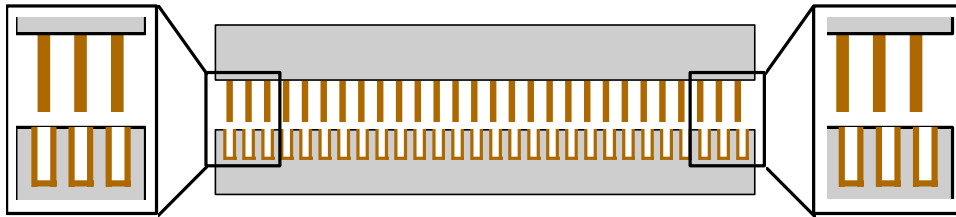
Misalignment due to stack-up of positional tolerances
